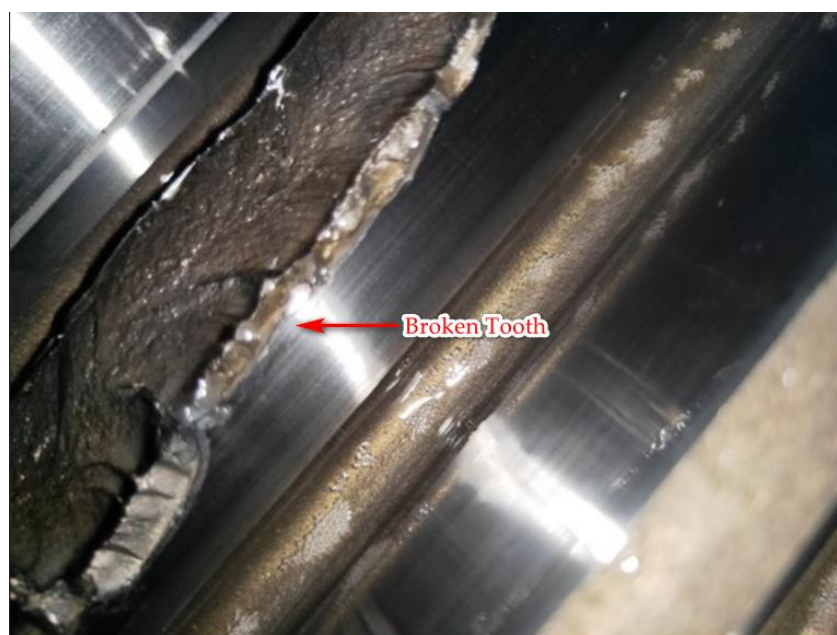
Gearbox med-speed gear broken tooth fault in wind turbine A.
